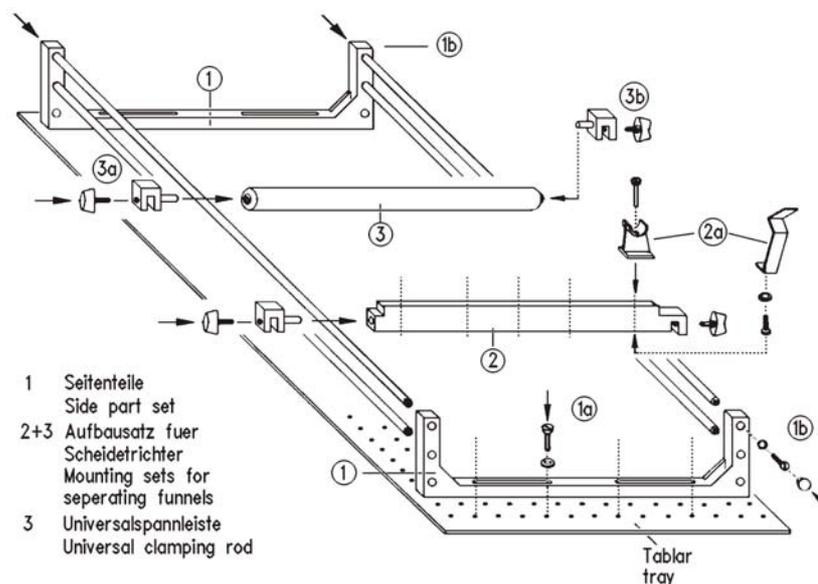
Assembly of universal rods and mounting sets for separating funnels
